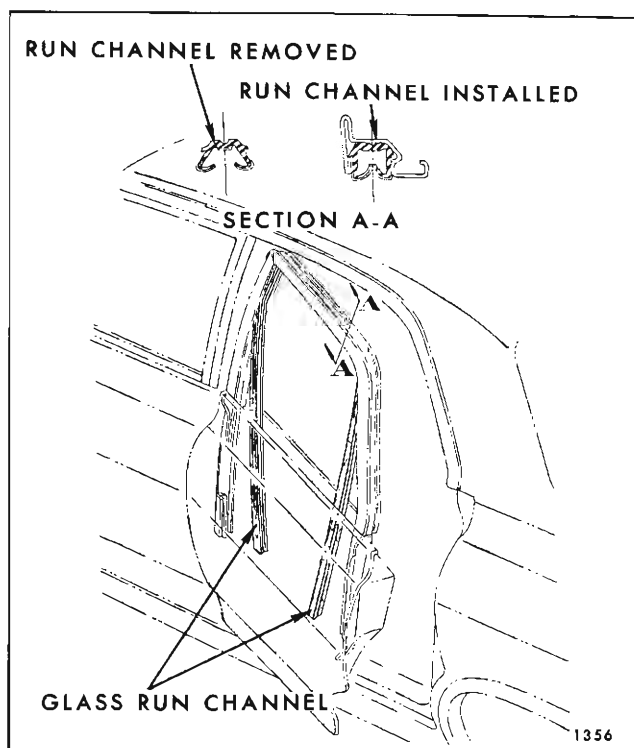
D42—"69" Style Rear Door Window Glass Run Channel Assembly
